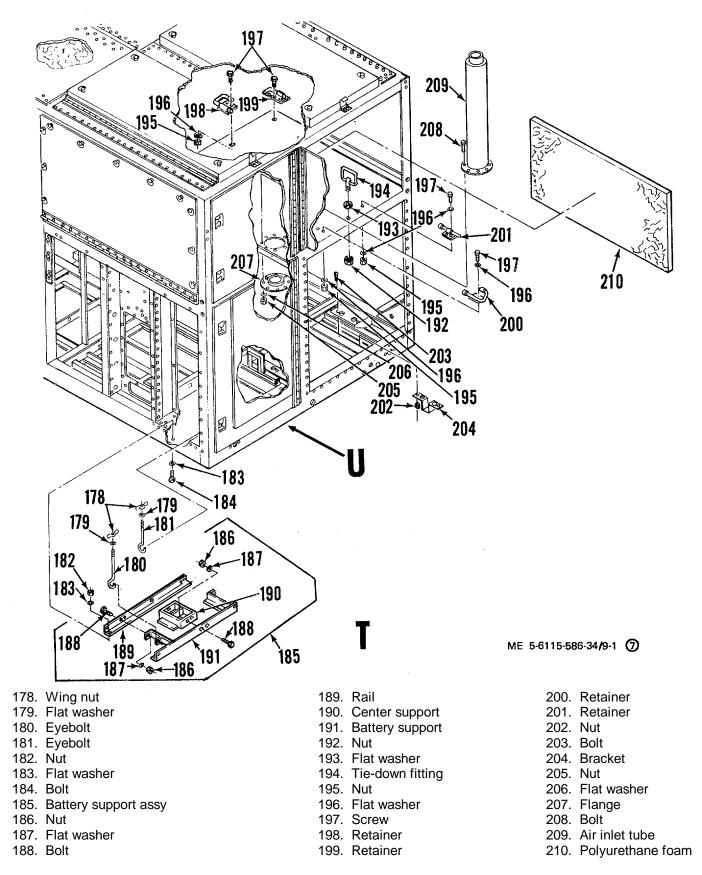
Enclosure assembly. exploded view. (sheet 7 of 10)
